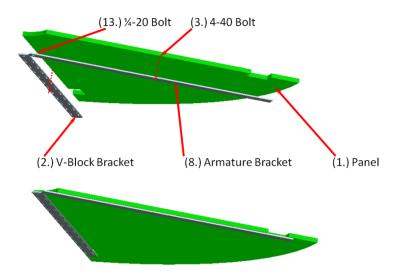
Shows (top) the exploded view for the components making up the support structure and reflector surface as numbered in Table 3 previously introduced and (bottom) the assembled view of the same components.
